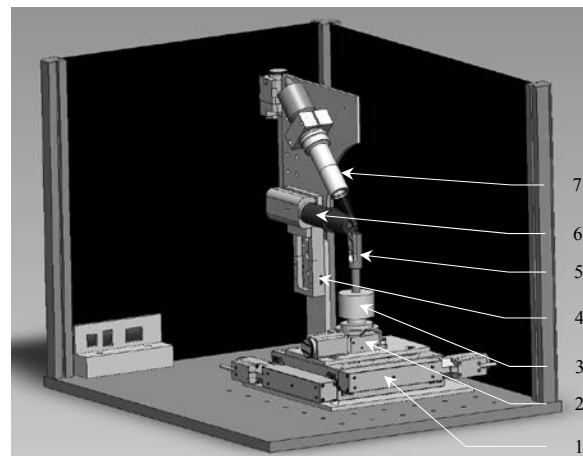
Design of ToolScan scanner: 1) *XY* moving stage, 2) rotary stage, 3) self-centering chuck, 4) *Z* moving stage, 5) tool under inspection, 6) camera, 7) light projector
